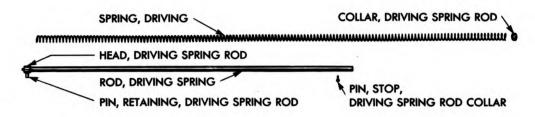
Driving Spring Rod, With Springs, Assembly— Exploded View
